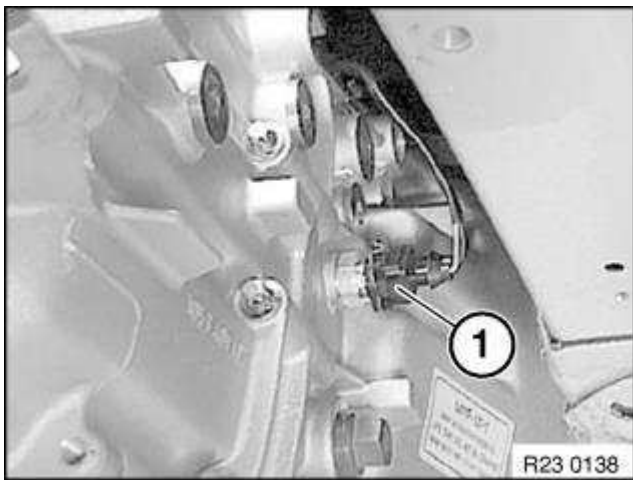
Disconnect Plug Connection (1) On Reverse Gear Switch (GS6-17DG/BG and GS6-37DG/BG Transmission)
